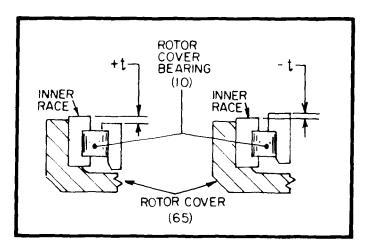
Initial Rolller Bearing Race Projection. (508644)
